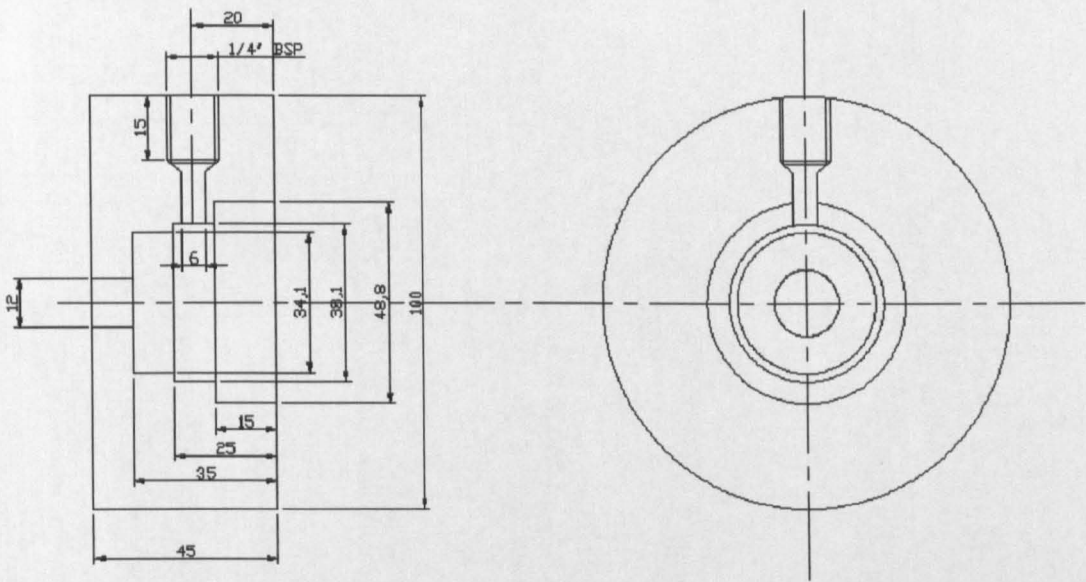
End Cap design for new tube mould (AutoCAD 2000)
